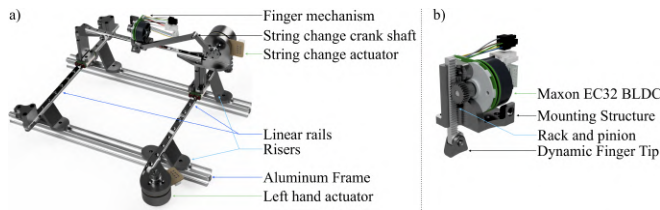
a) Fingerboard traversal design showing the left-hand traversal. b) String stopping mechanism showing the dynamic finger tip.
